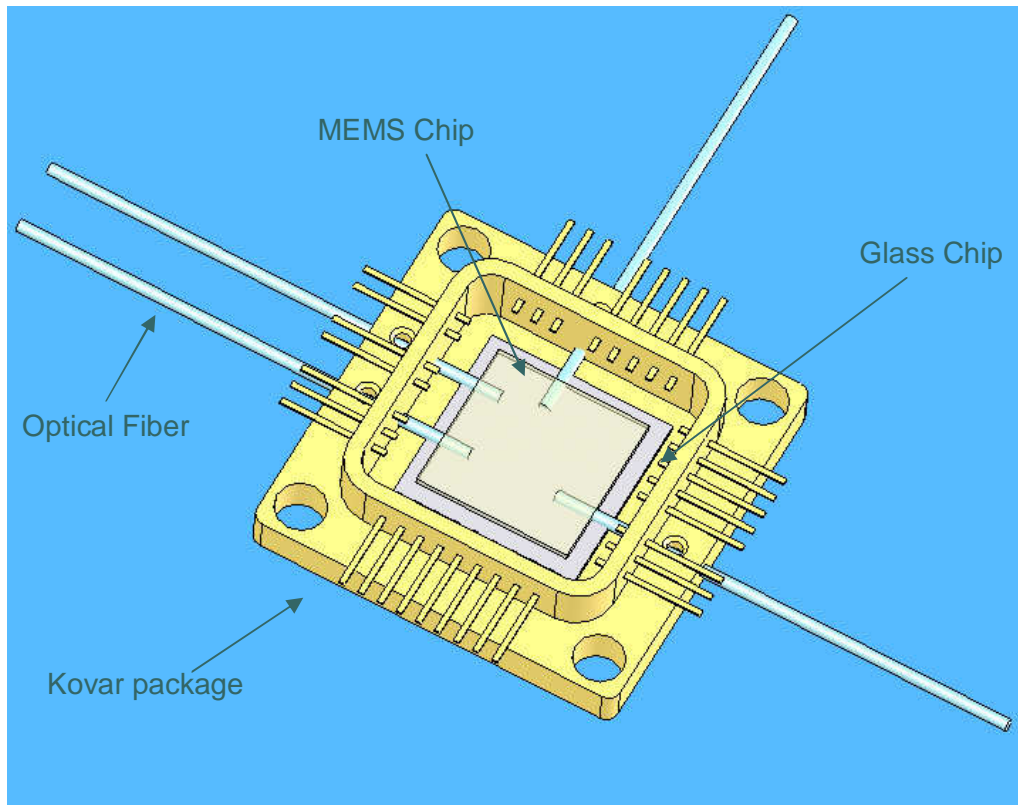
Schematic of a Package assembly with Die and glass chip attach
